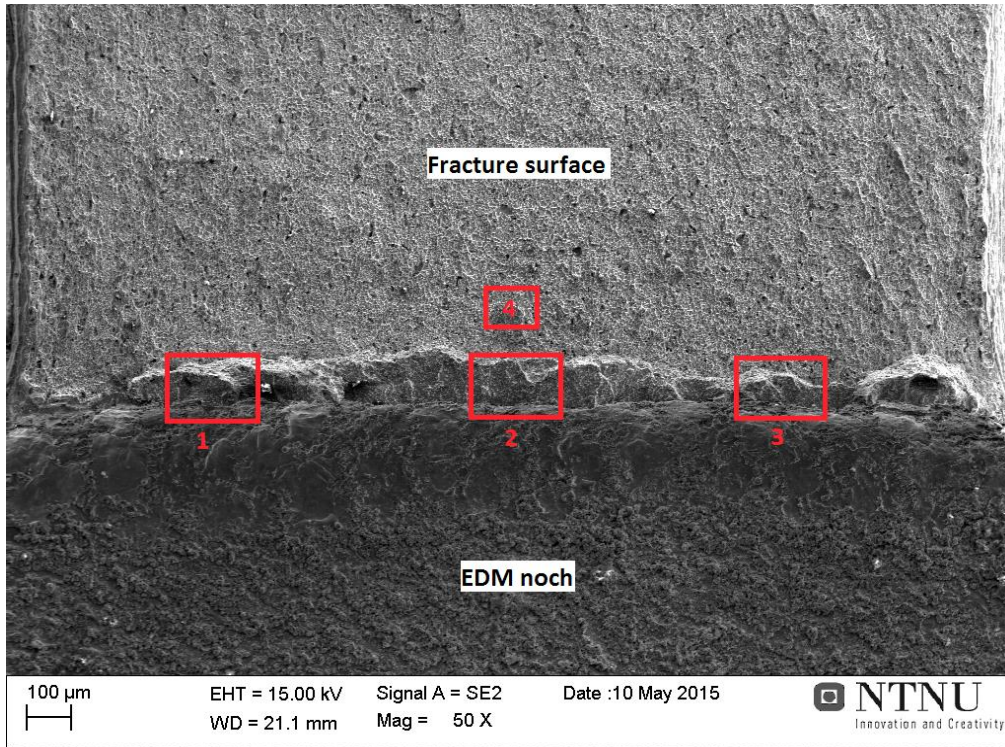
Sample A, test 5, fracture surface on clad section of specimen.
